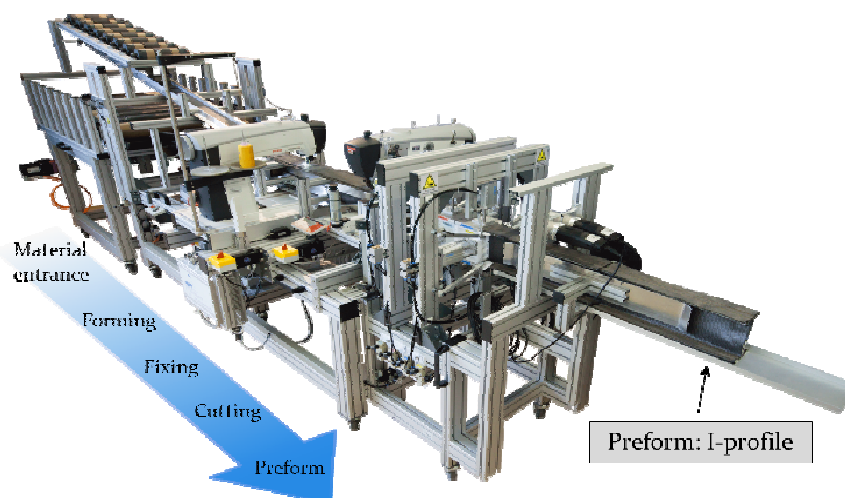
Continuous Profile Preforming System (CPPS) including a material conveyor, folding, stitching, cutting, and trimming unit.
